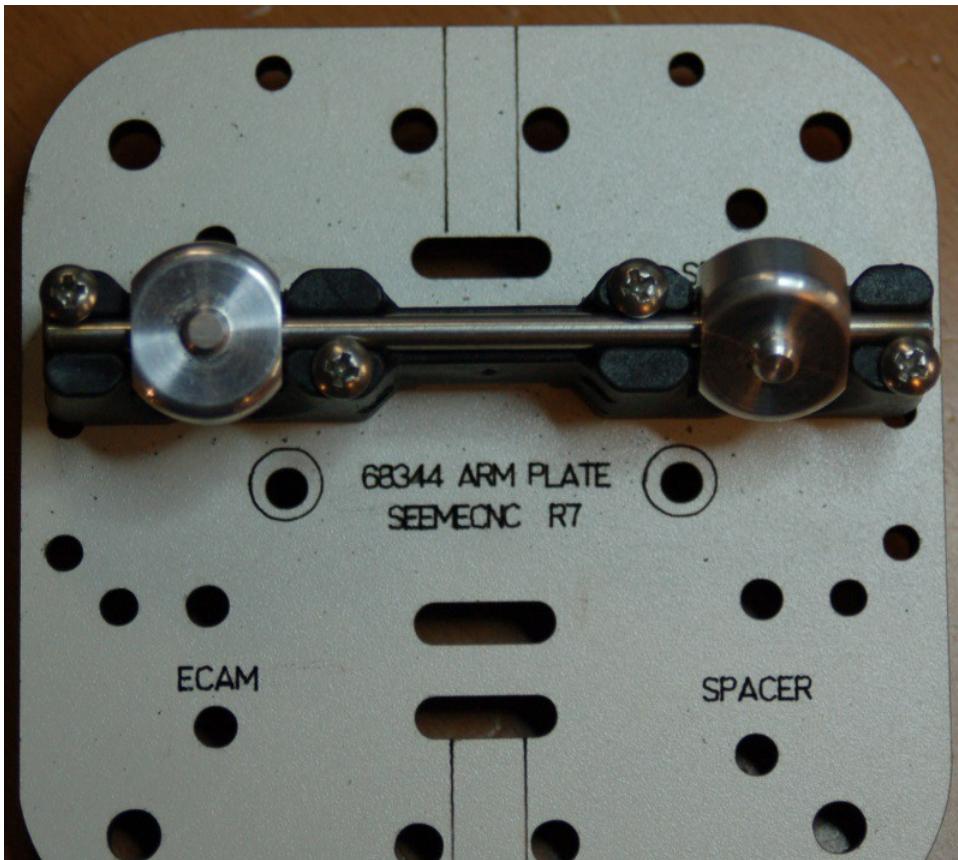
Carriage U-Joint mount installed in the arm plate.
